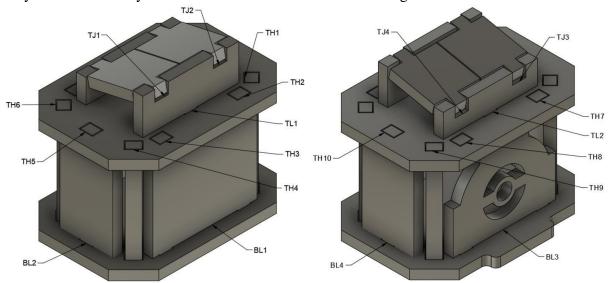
Isometric views of Pokecenter design with welding codes
